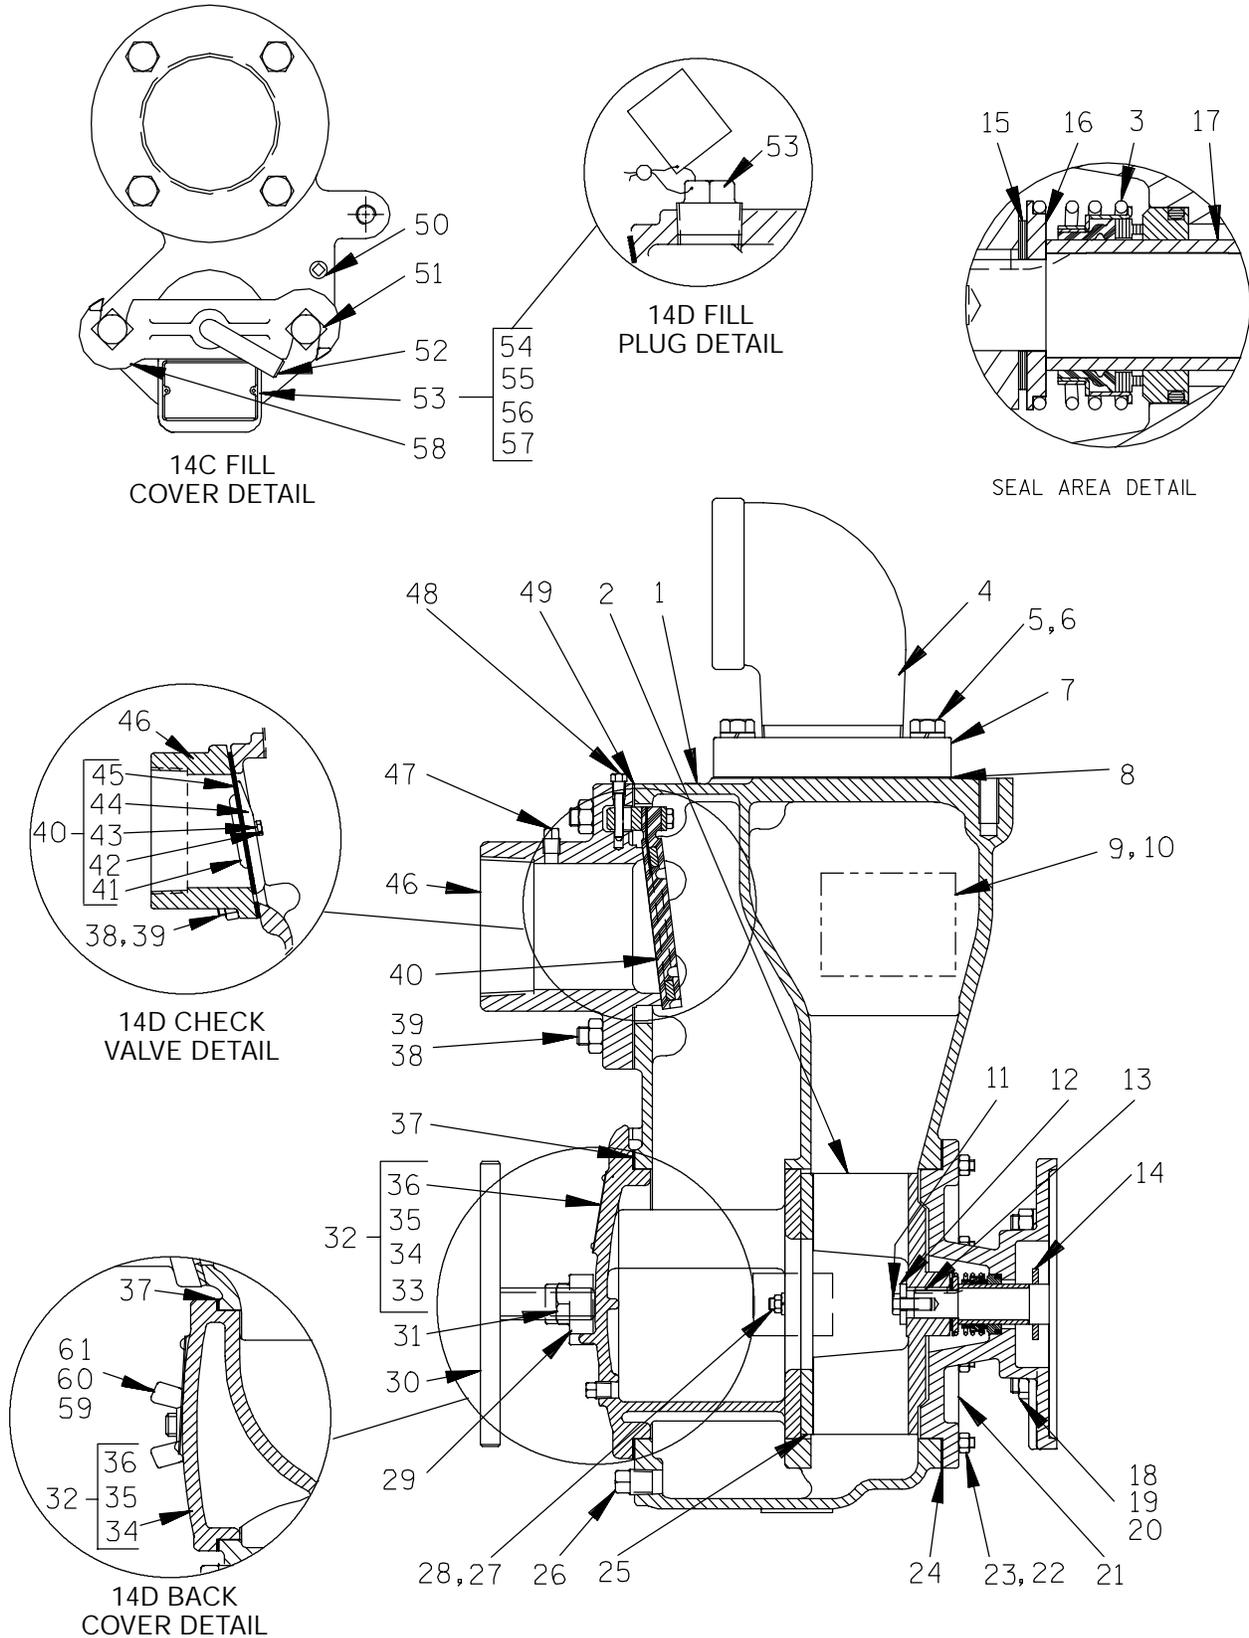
Typical 14C And 14D Pump End Assembly w/Self Lubricated Mechanical Seal
